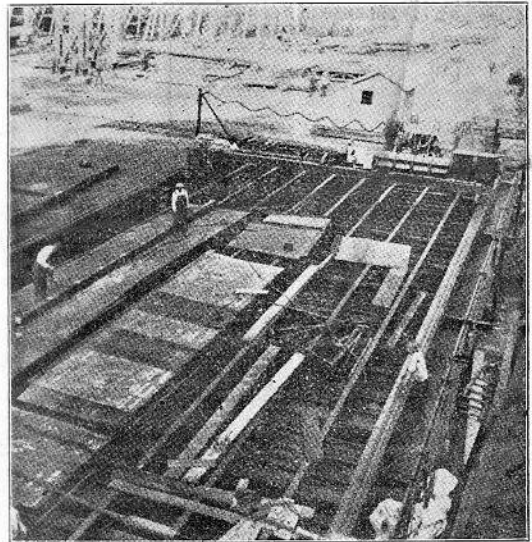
Automatic machine for welding bulkheads at Newport News.
